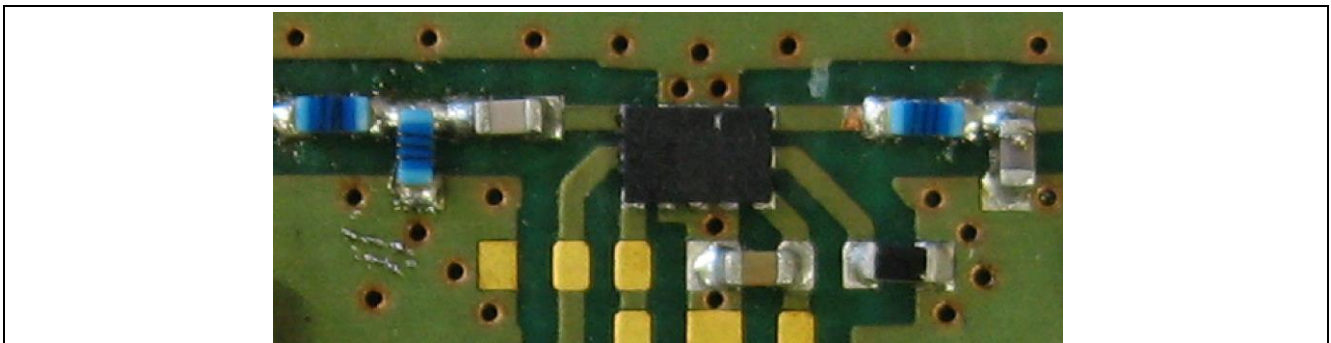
Picture of Evaluation Board (Detailed View) of BGA777N7 V1.0
